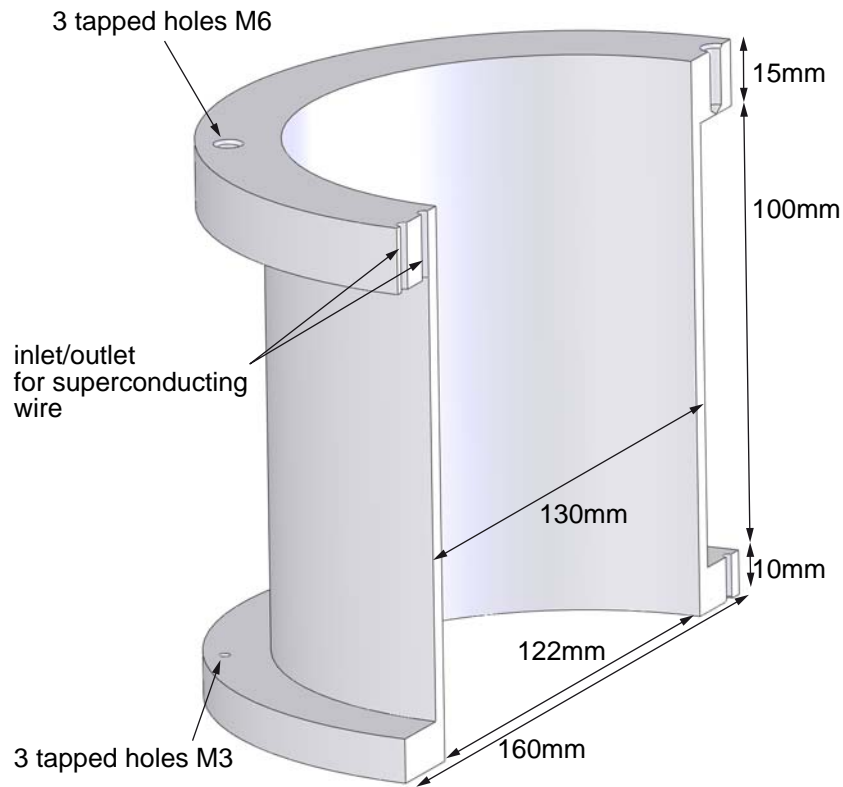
Technical drawing of the aluminium former of the heat switch magnet.
